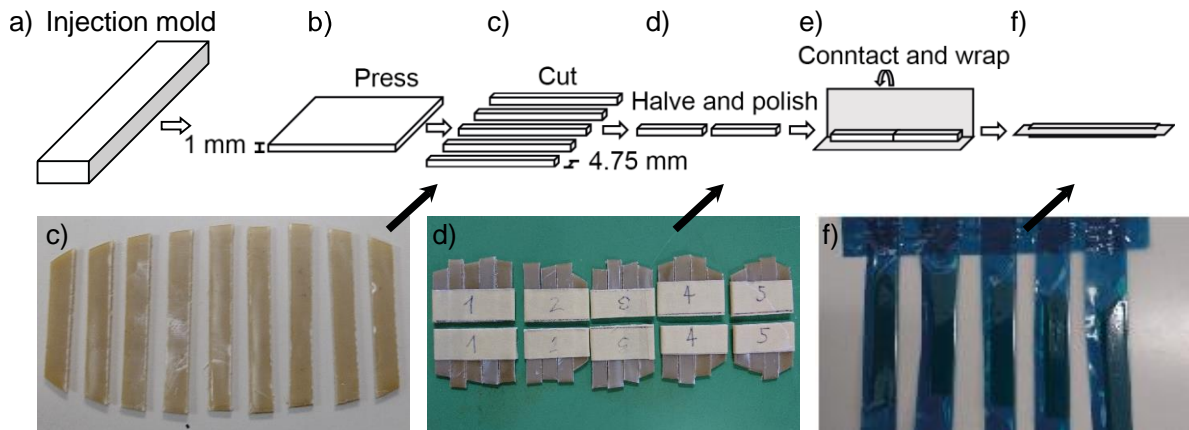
Schematic representation and images of the sample preparation process for welding time tests, starting with a) the injection molded bar, which is b) being pressed into a 1 mm thick plate and c) cut into 4.75 mm wide strips. Those are in turn d) halved and polished and e) wrapped with adhesive tape to ensure alignment of the cut surface to f) obtain the wrapped sample before it is used in healing experiments.
